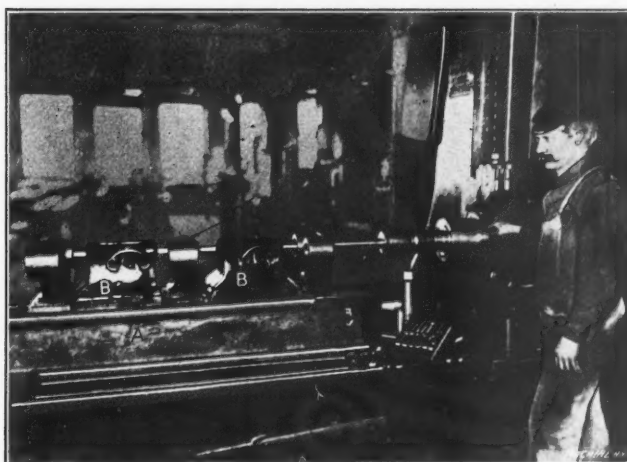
Boring Tailstock Spindle Holes in a Horizontal Boring Machine
